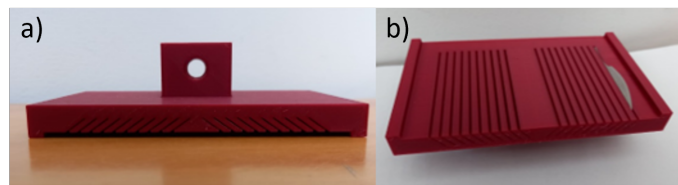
Printed final cutting parts: a) front view; b) inclined top view.
